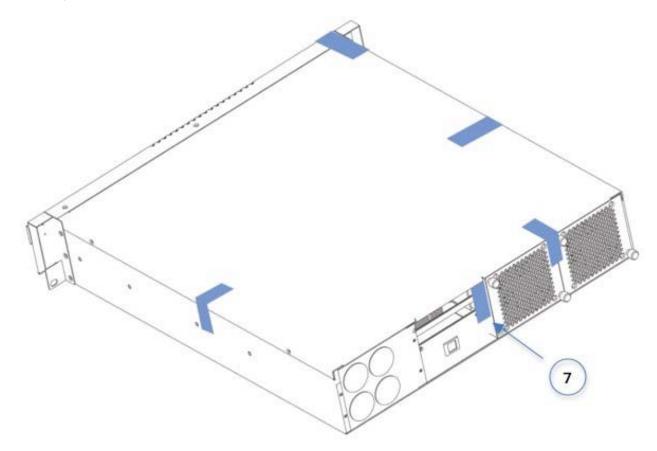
GX5000 Tamper Evidence Label Placement (Rear/RIght)
